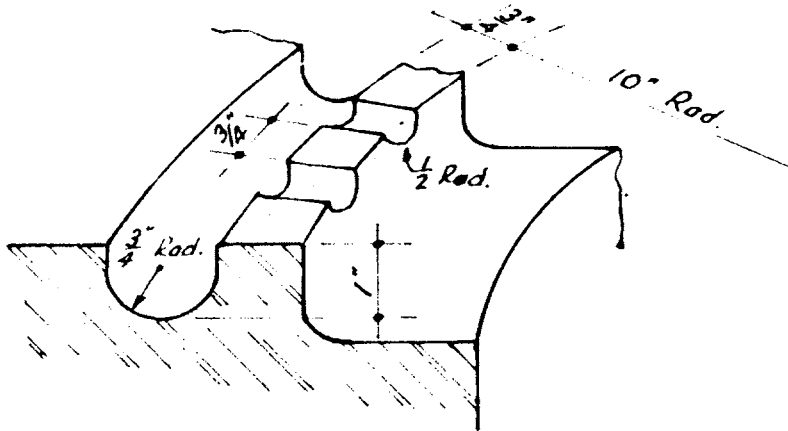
A section of disc A showing the proposed centering register on a radius of ten in. and the keyways to prevent the shaft rotating on the rotor.
